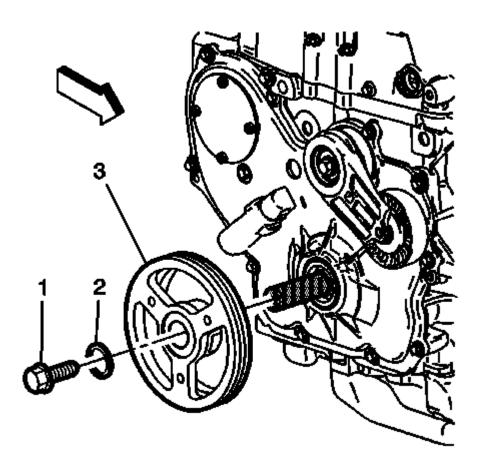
Bolt, Washer And Crankshaft Balancer Courtesy of GENERAL MOTORS COMPANY
